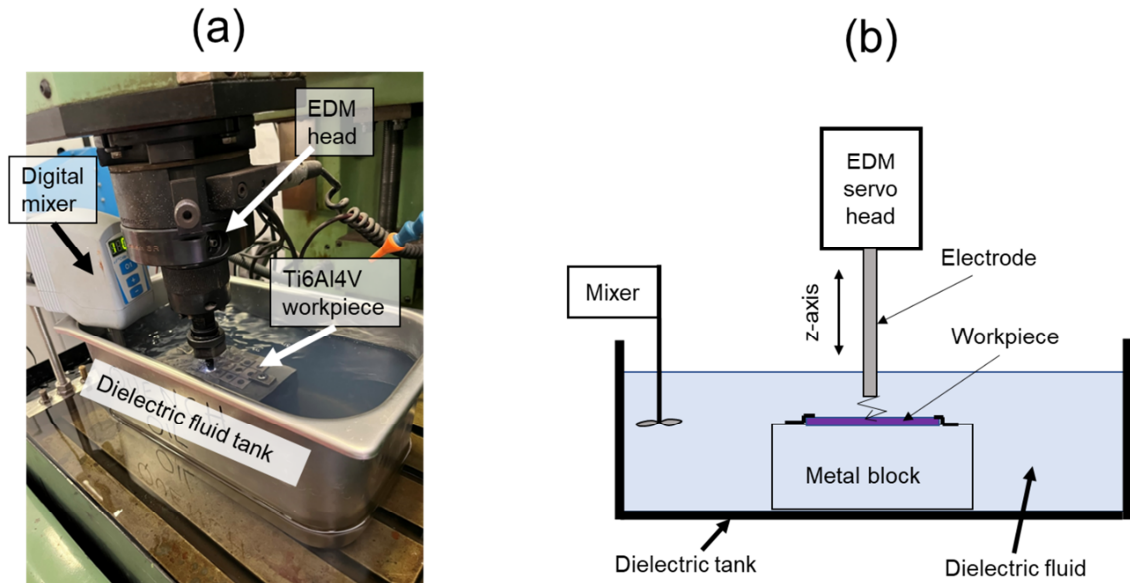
EDM machining setup (a) EDM set-up, (b) a schematic drawing of the experimental setup.
